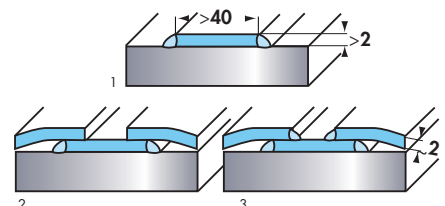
"Wallpapering" by GTA cold wire or hot wire welding "on webs (grids)".
